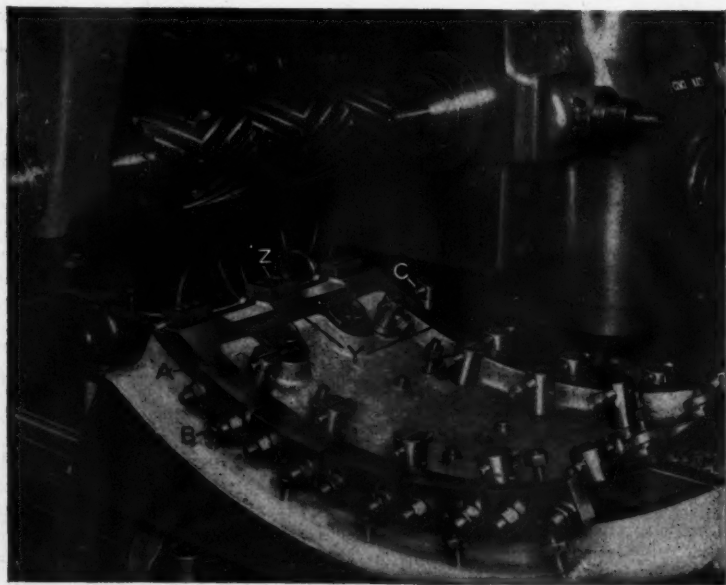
The fixture for holding the Nimonic frame during profile milling on the Cincinnati machine, which has been adapted by Rolls-Royce, Ltd.
